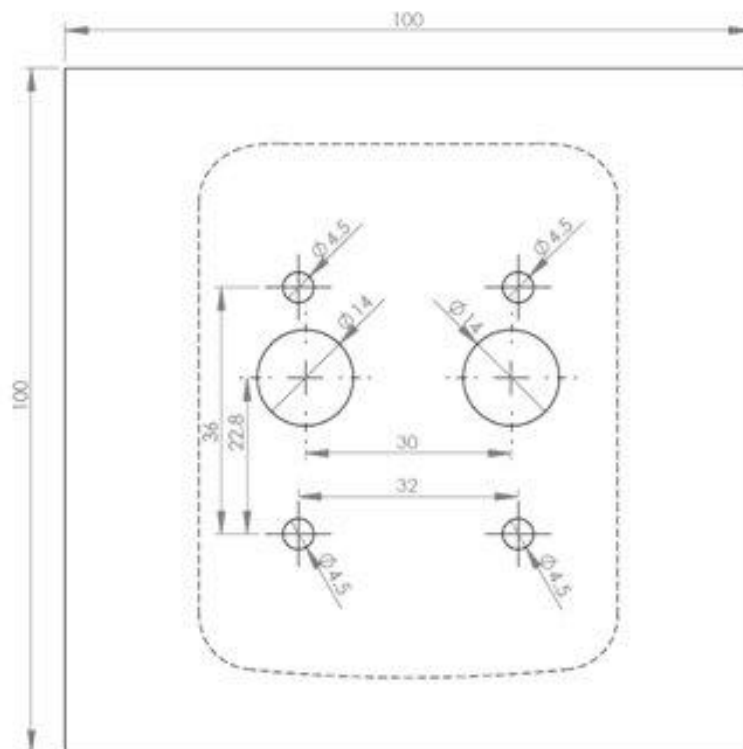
SATURN 8700 USB - Panel Mounting Drilling Template
